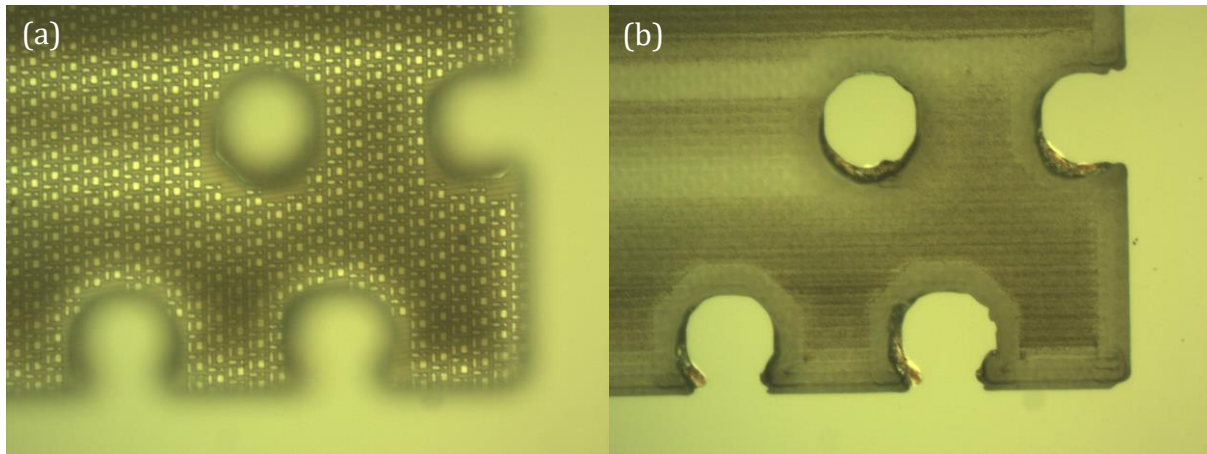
Optical microscope pictures of the back-side of the assembly, focus being done at the SiPh IC surface (a) and the interposer RDL level (b)
